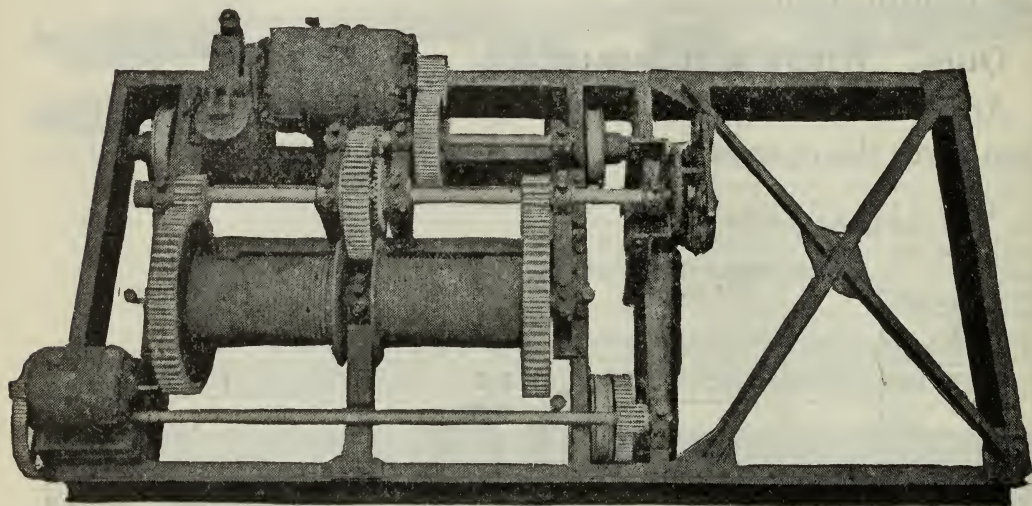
,220.—Niles crane construction: Standard grab bucket trolley suitable for operation with a two rope grab bucket, one rope being attached to bail of bucket and the other attached to the opening mechanism. The trolley framing consists of heavy steel channels securely riveted together, making a self-contained and rigid construction to which the mechanism is attached. The trolley is of the double drum type, each drum being operated independently of the other or in unison through the medium of one train of compensating gears. The hoisting drums are finished all over, and have grooves cut so that the bucket is lifted vertically without twisting, and the load is distributed equally to both bridge girders. The bearings in the drums are bronze bushed and revolve on a steel drum shaft in which allowance has been made for all bending strains and in which all torsional strains have been eliminated. The steel drum gears are forced directly on to the drums and keyed. All shafts run in self-oiling cap bearings with removable bushings. Any shaft may be removed without interfering with any other. One drum is fitted with a powerful foot brake of the post type, perfectly balanced and positively withheld from contact with the brake wheel, except when applied by the operator for the purpose of opening the bucket. The brake is operated by a foot lever conveniently located in the cage. The bucket is held by two sets of rope, the tension in which is always equalized through the compensating gears, avoiding the possibility of slack ropes and insuring the retention of the bucket by one of the ropes should the other break. The hoisting mechanism is controlled by powerful brakes, preventing the dropping of the bucket or running down by gravity under any condition of service. Hoisting, lowering, opening or closing the bucket is under the complete control of the operator at all times. The opening of the bucket or dumping of the load is by the simple application of the foot brake. When the open bucket comes in contact with the material to be handled, the controller is moved to the hoisting position. This closes and thereby fills the bucket, which, without further manipulation, is hoisted to the desired dumping point. The mechanism is always in position to repeat the operation, insuring, by its simplicity, high speed of operation with moderate speed of mechanism. Clutches or other parts liable to excessive wear are eliminated. Regularly built with direct or alternating current motors, which are bolted directly to the steel frame.
